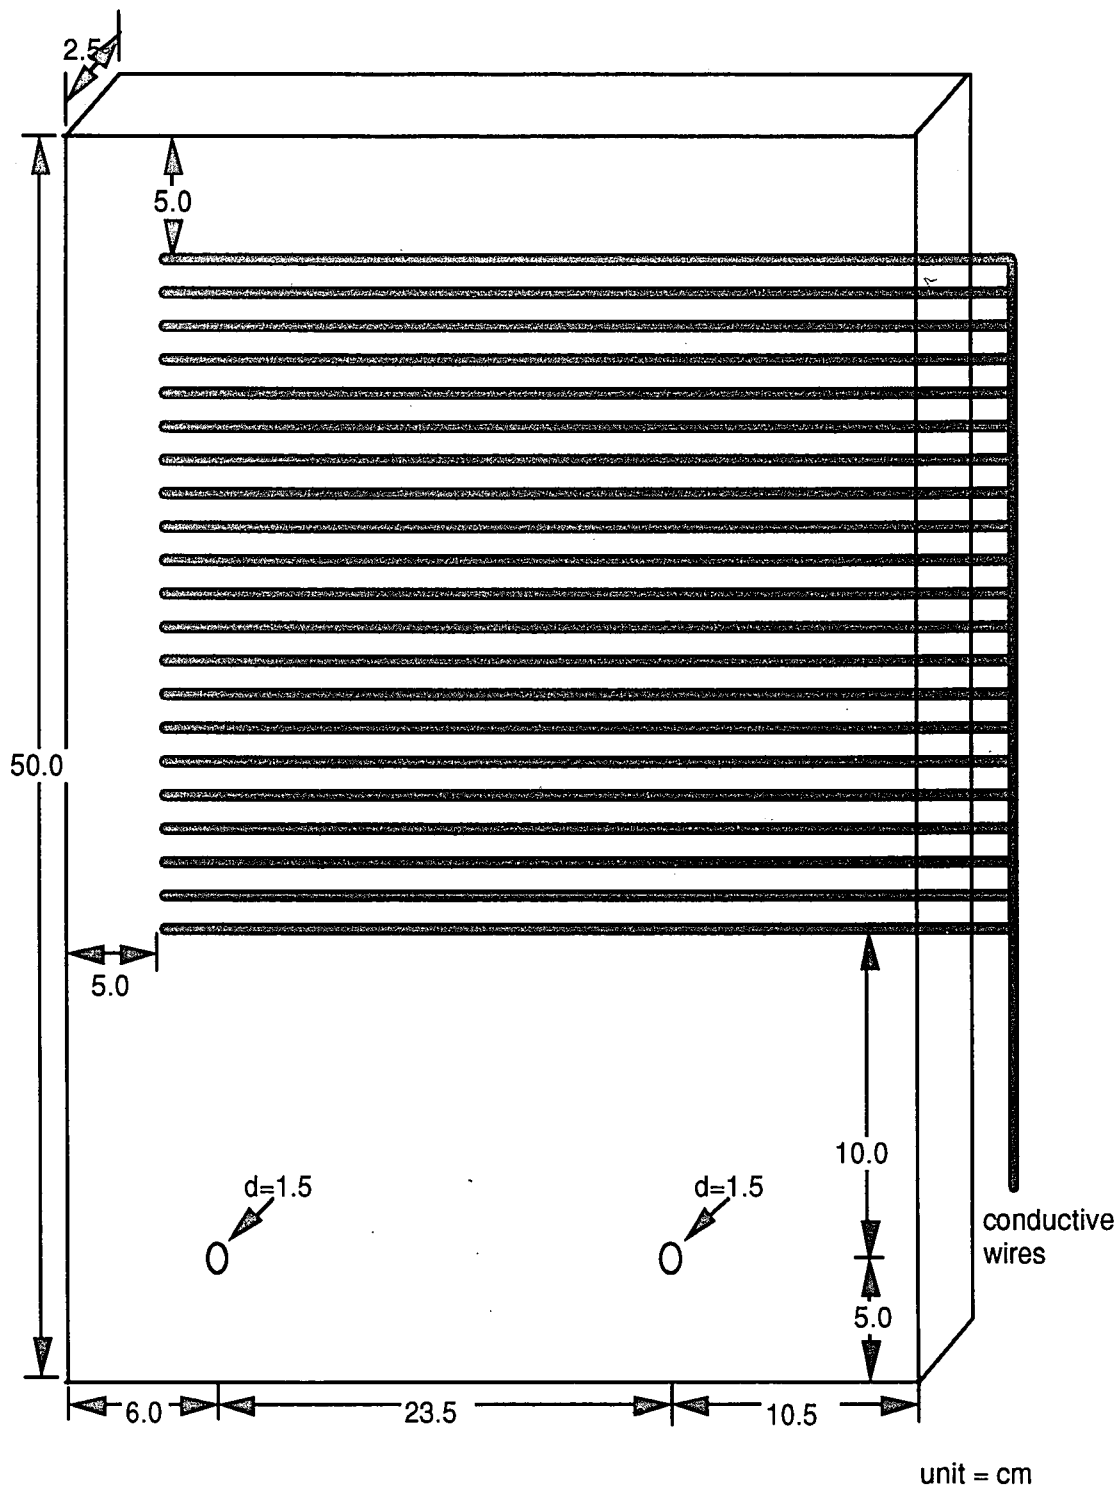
Dimensions of mold bottom plate for two-dimensional experiments
